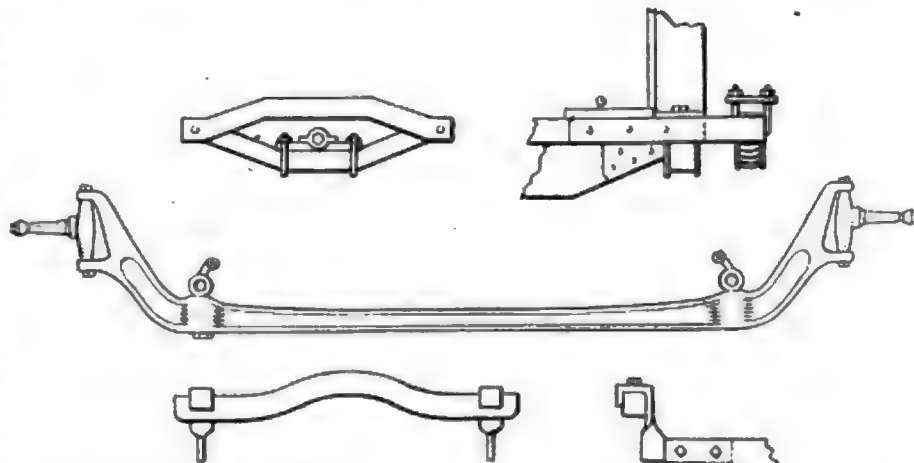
Top—Method of lowering front end of frame by lengthening frame out and installing extra front cross member. Center—Dropped front axle. Bottom—Method of lowering rear end of frame 4 in.
